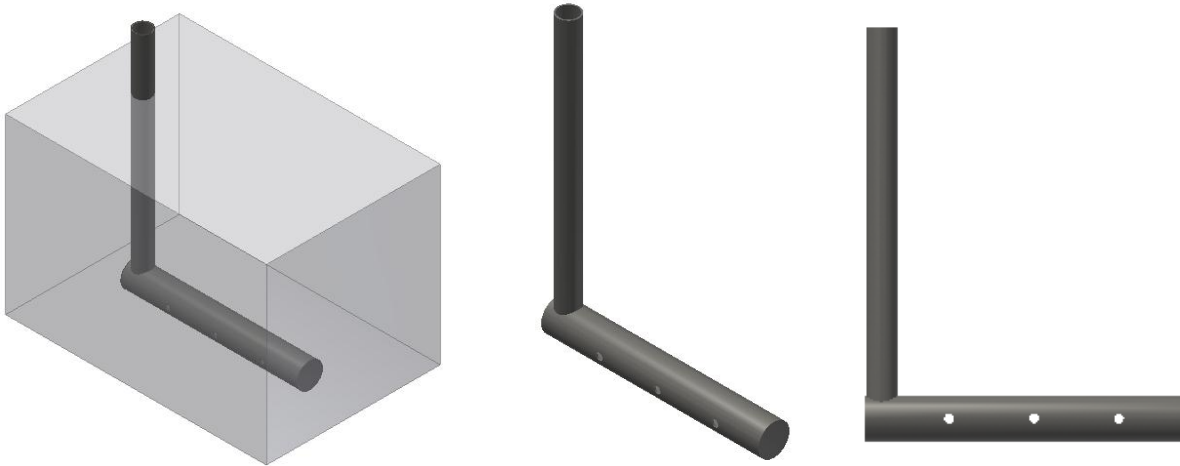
Left: Internal gating within a rectangular casting. Center: Isometric view of the internal gating system. Right: Front view of internal gating, displaying the drilled holes acting as ingates.
